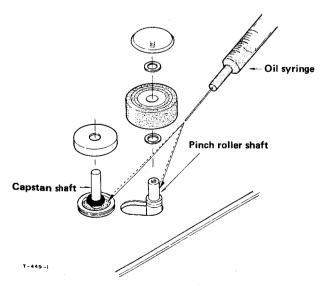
Capstan Shaft and Pinch Roller Shaft Oiling Points
